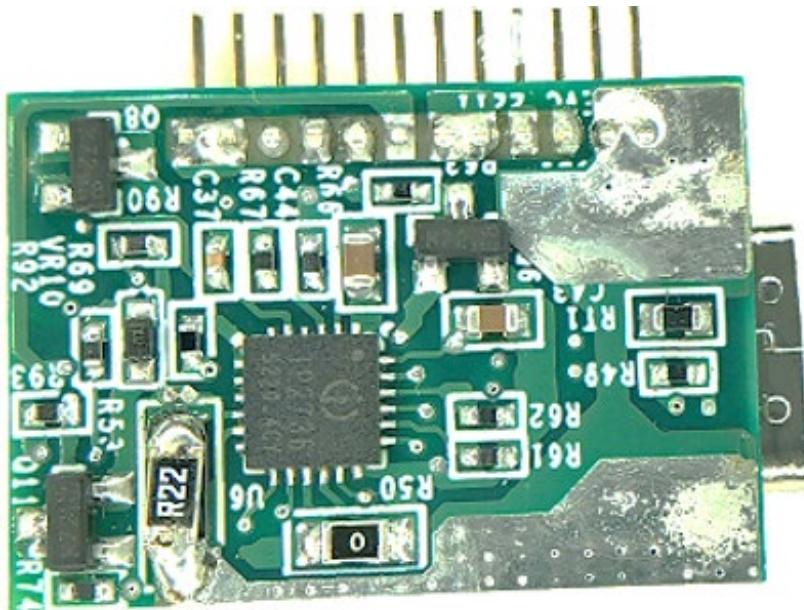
Populated Circuit Board Photograph – Daughter Board Bottom.
